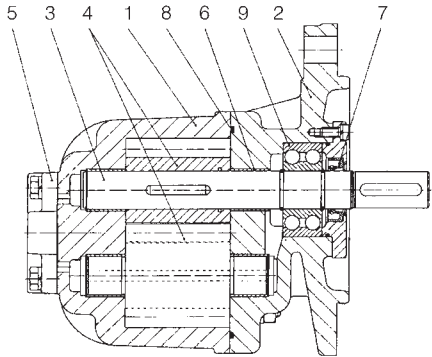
Pump with outboard bearing, special code 197 (with shaft-end sealing)
